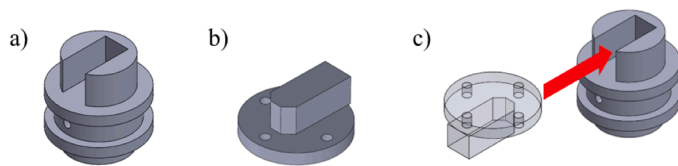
Detail views of the keys and pulleys used for transferring force to the continuum wires while still allowing the wires to be replaced for servicing and sterilization. (a) 3D structure of the wire pulley. (b) 3D structure of the motor-mounted key which fits into the wire pulley. (c) Fit of the key into the wire pulley slot.
